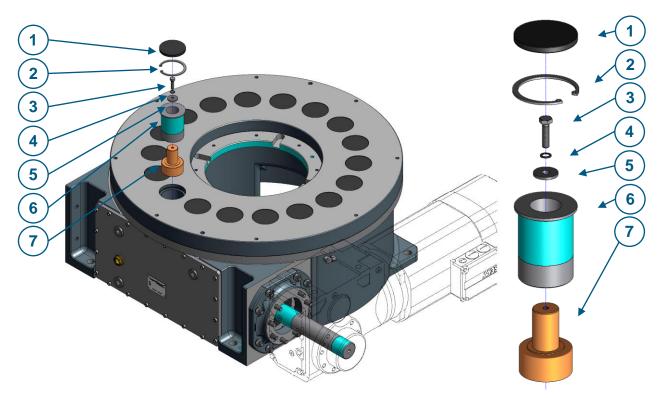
Assembly sequence cam follower TMF2000 - TMF8000
